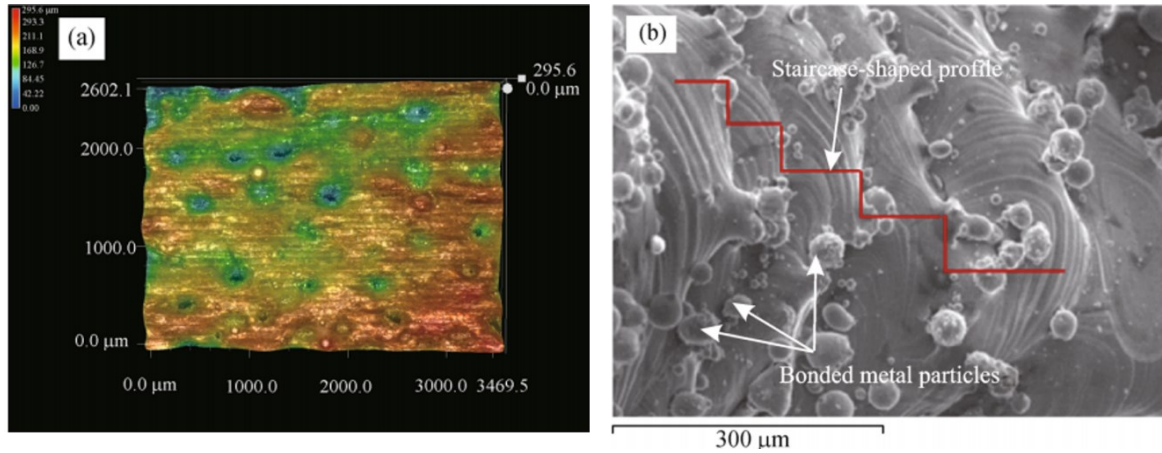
Surface morphology of the SLM fabricated parts. a) top view, b) surface view [275].
